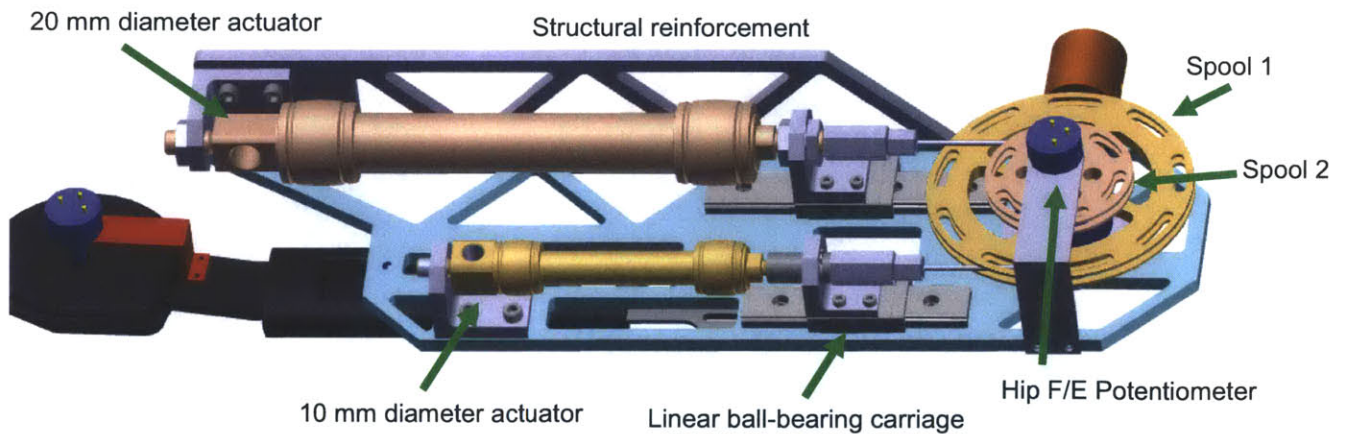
Rendering of hip flexion/extension joint assembly
